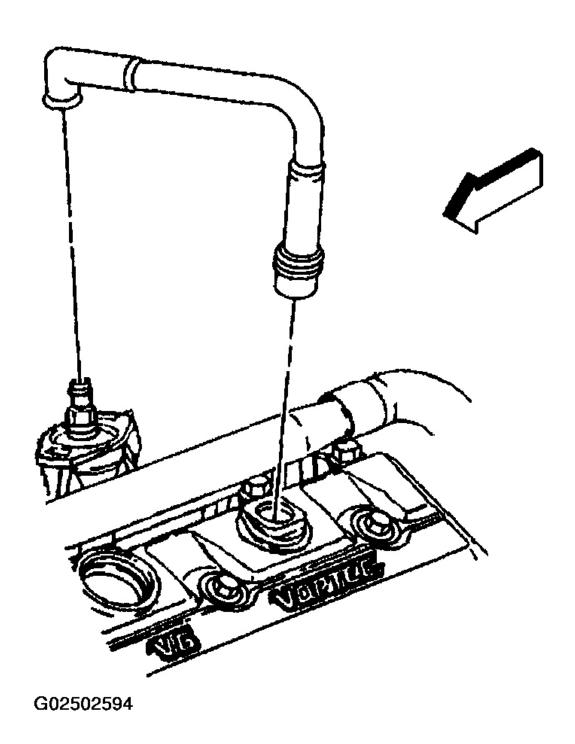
Installing PCV Valve Hose Assembly Courtesy of GENERAL MOTORS CORP.
